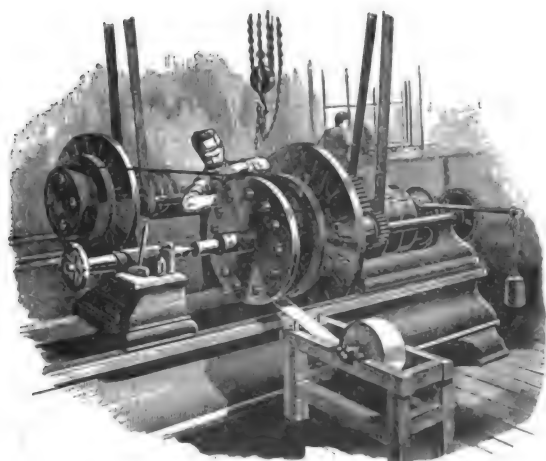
WINDING IRON CORE OF SHORT RAILWAY MOTOR.
